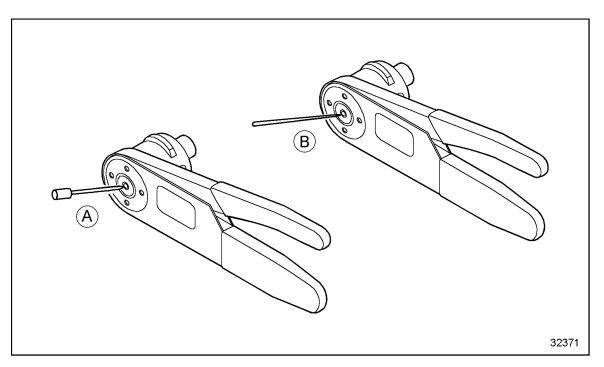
Inserting the Terminal and the Stripped Wire.
